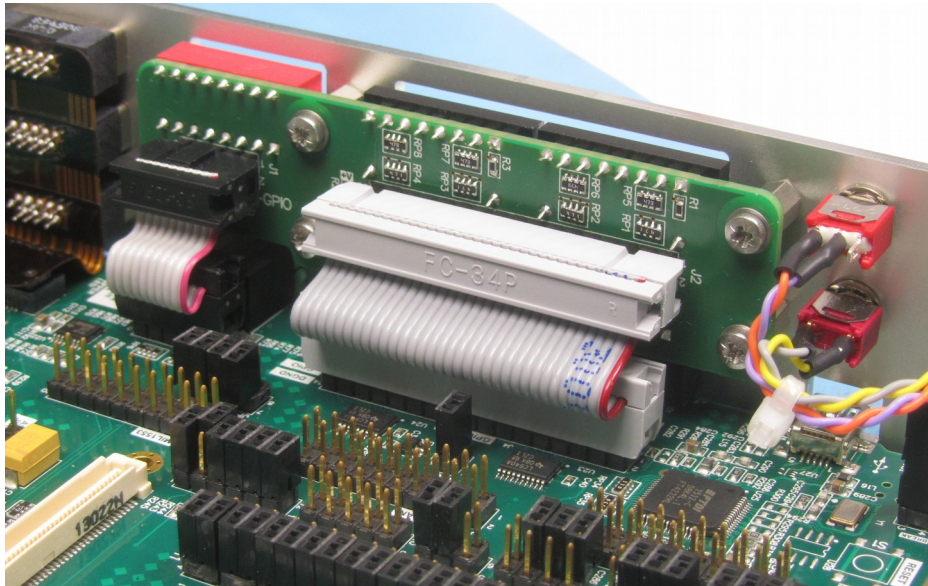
Auxiliary PCB for DIP Switches and front panel GPIO connections
